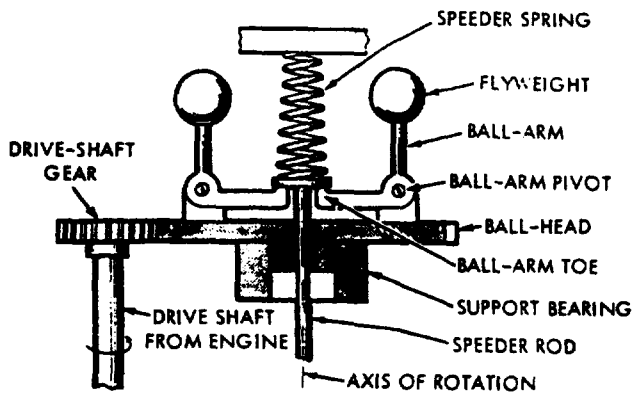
Centrifugal Ball-Head Mechanical Sensor.
